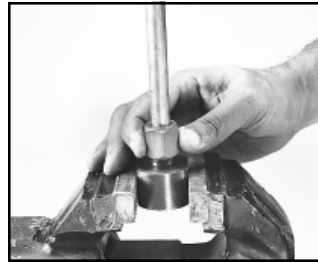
Manually screw nut onto Ferulset Tool or fitting body until finger tight.
